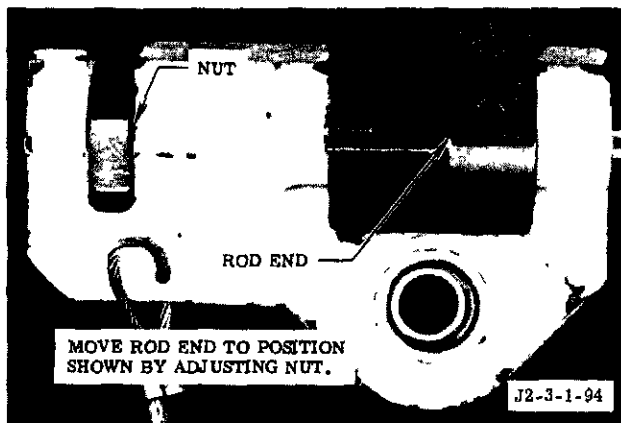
Adjusting Turnbuckle Prior to Installation
